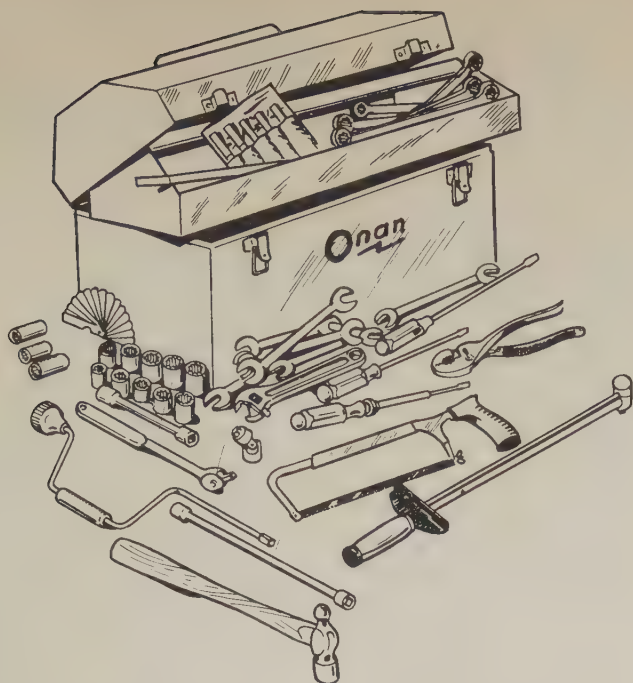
A set of tools for a small-engine mechanic. (Onan Corporation)
